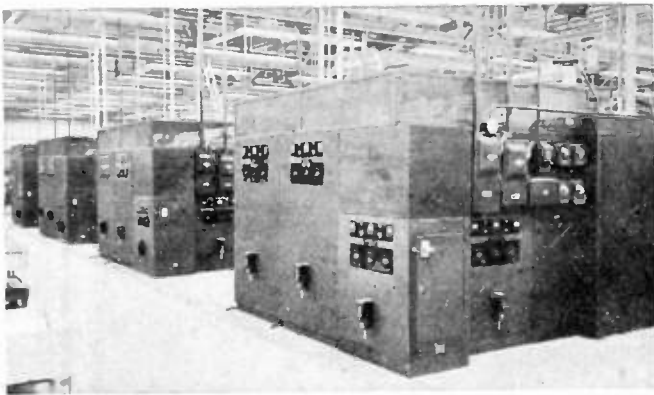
Electronic-heater installation used in the manufacture of vacuum tubes at the General Electric vacuum-tube plant. Each group consists of two 5-kilowatt and two 15-kilowatt General Electric heaters.
